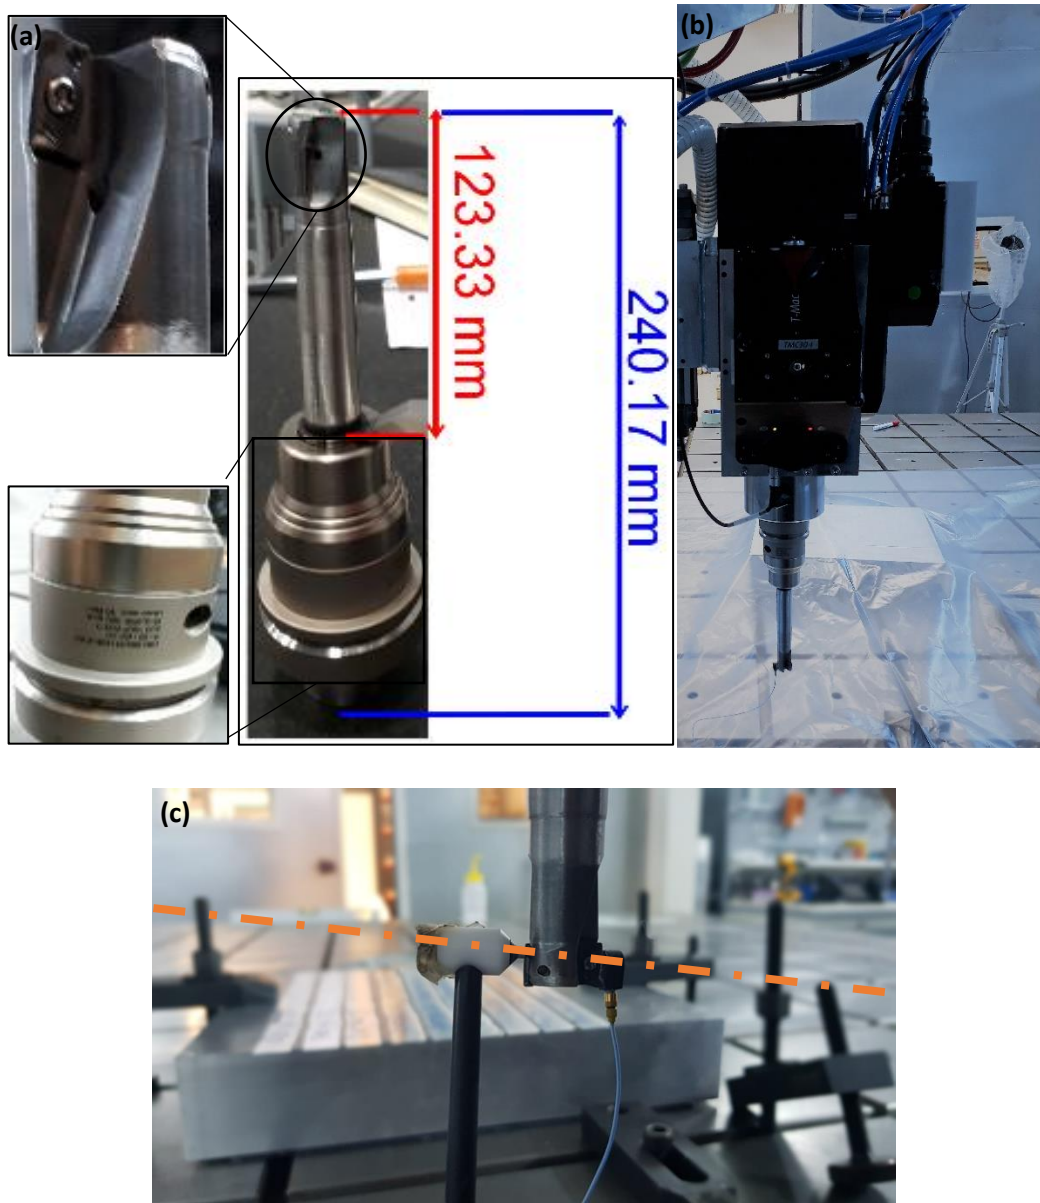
(a)Indexable milling tool with inserts and length properties, (b) milling tool, accelerometer and spindle representation (c) alignment of the accelerometer and mini-modal hammer position
